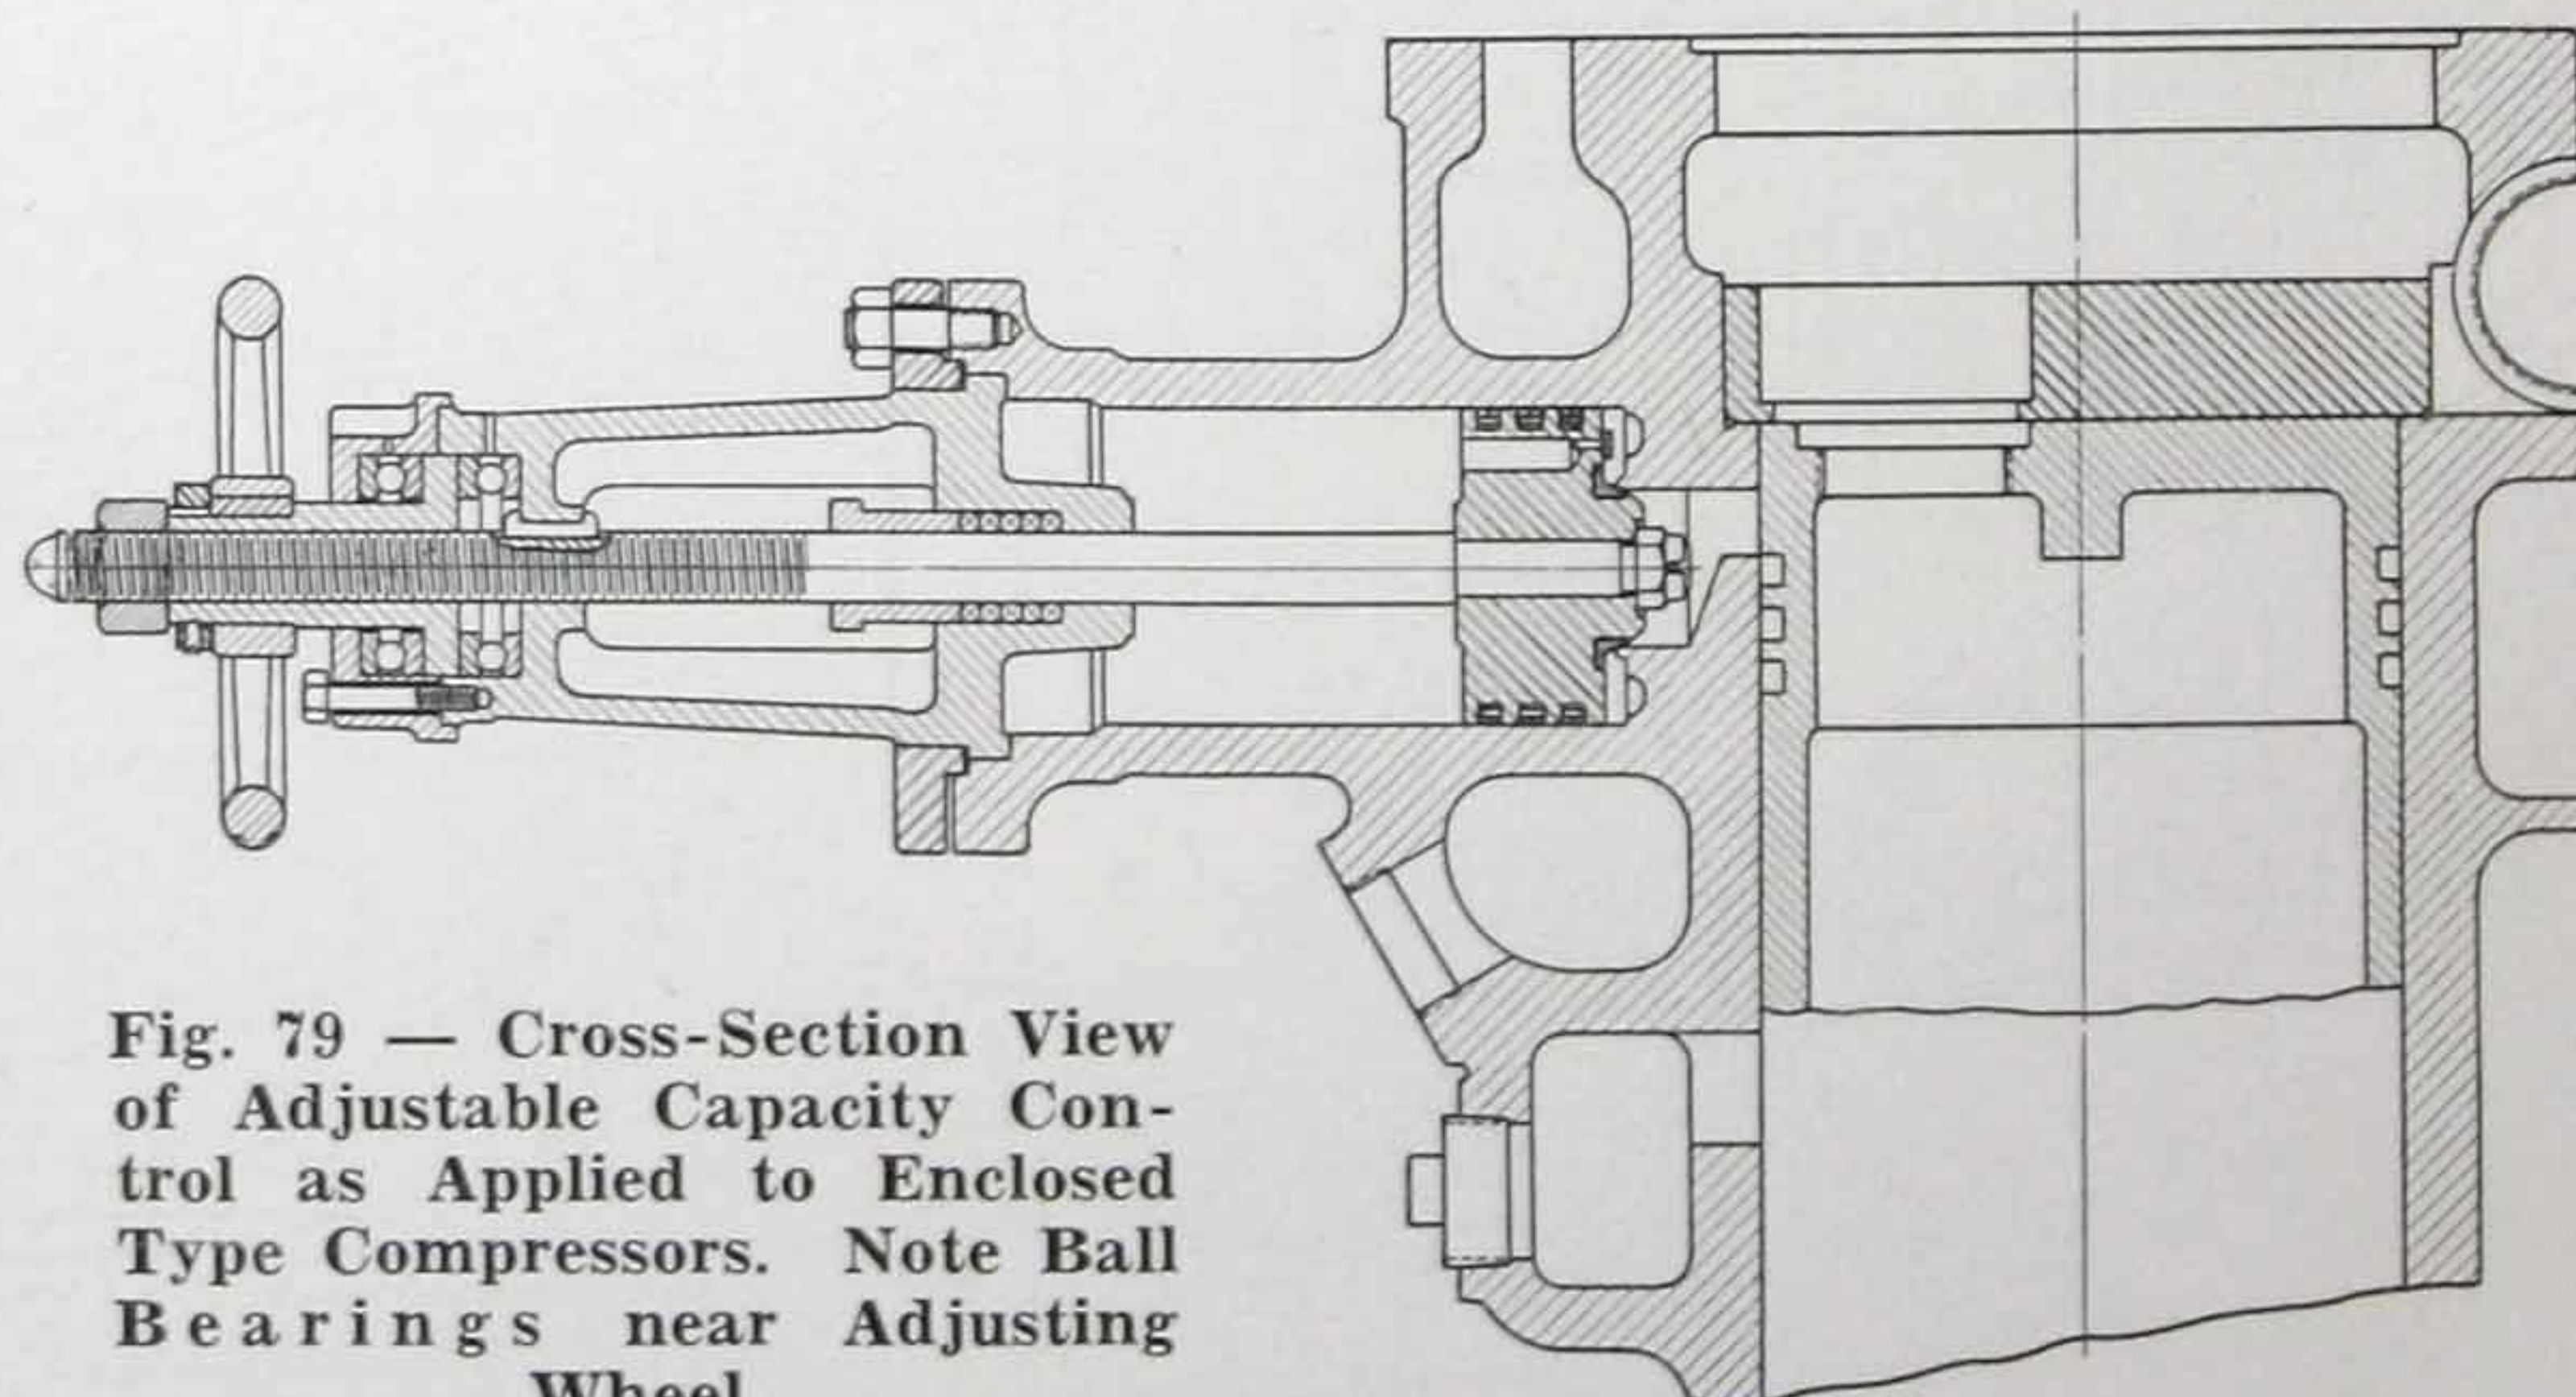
Cross-Section View of Adjustable Capacity Control as Applied to Enclosed Type Compressors. Note Ball Bearings near Adjusting Wheel.
